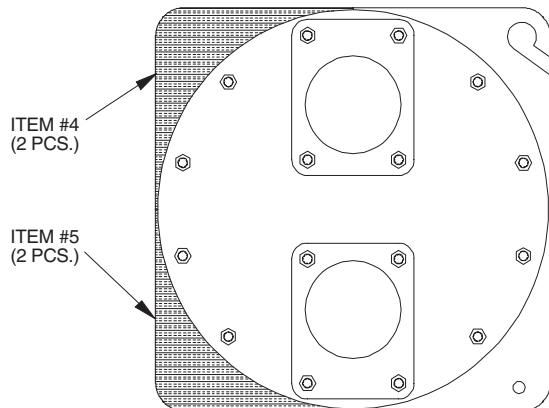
Outside Tubesheet Face (Half-Insulated)
